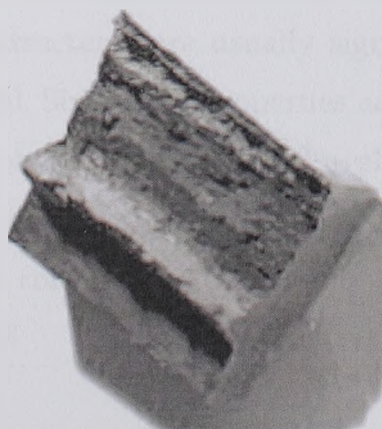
Appearance of fracture face. <sup>[81]</sup>
